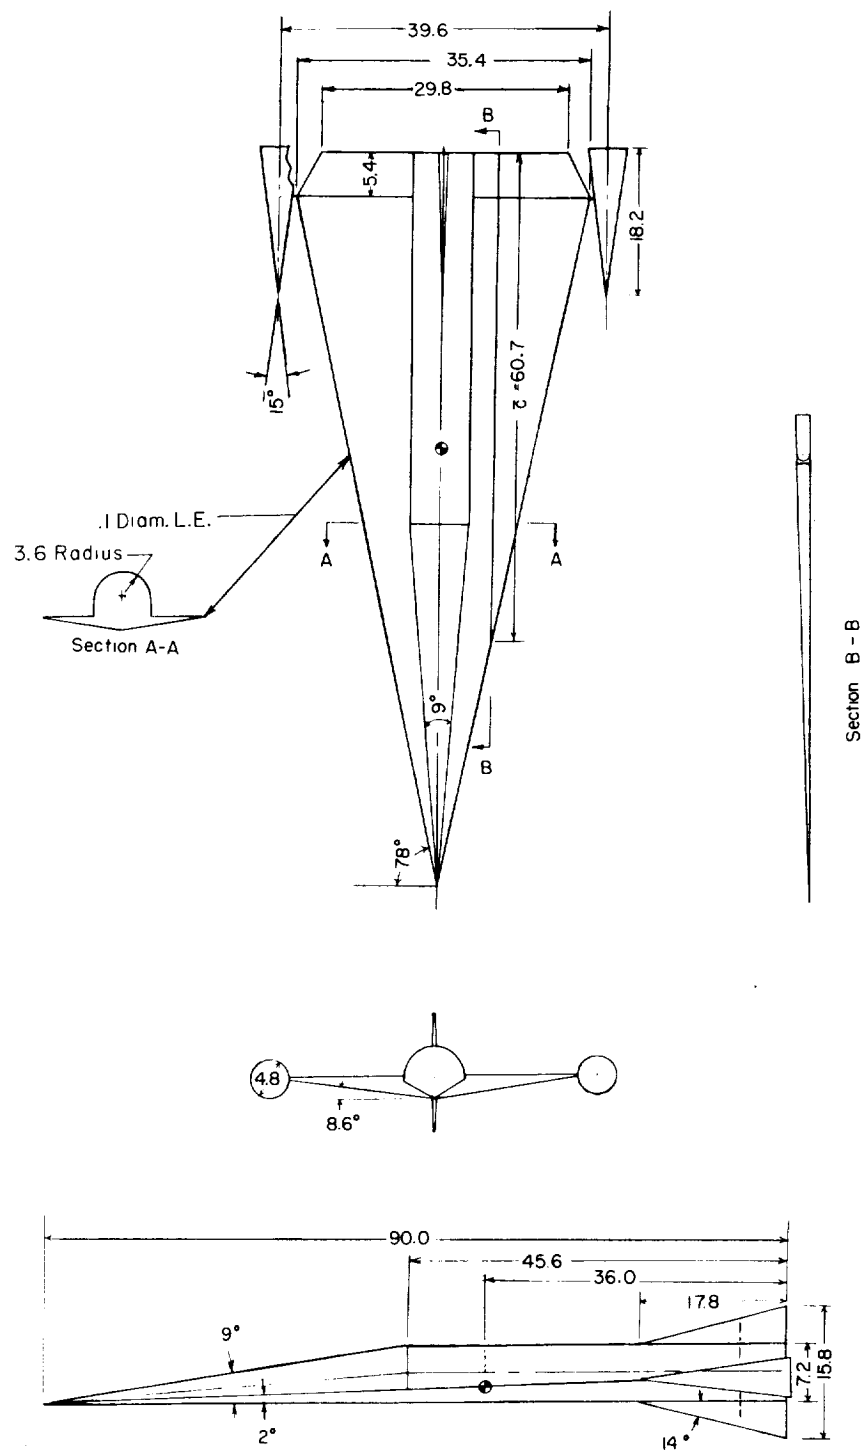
Three-view drawing of model used in investigation. All dimensions are in inches.
